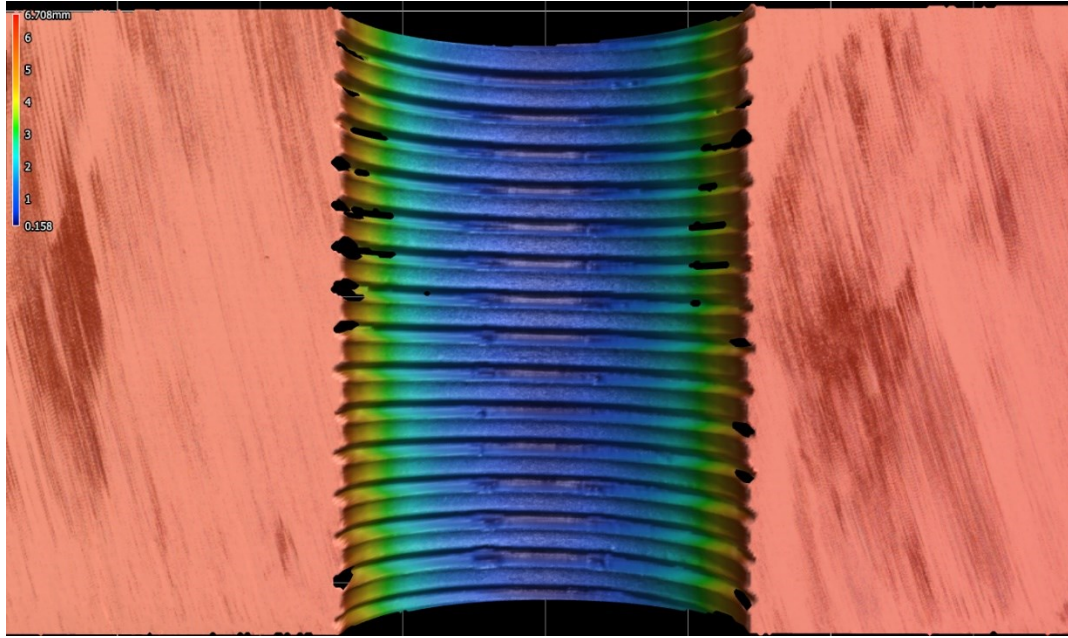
Specimen 1A hole 13 cross section 3D scan.
